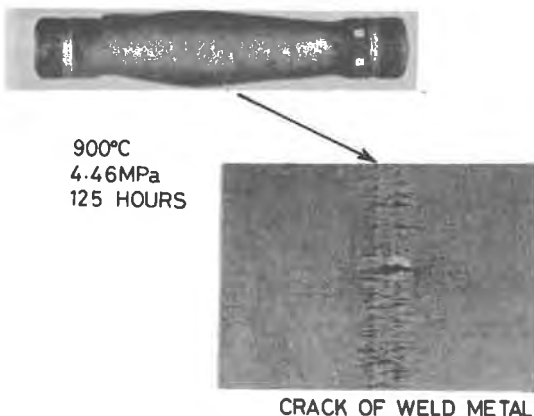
Deformation of the electron-beam welded cylinder after creep testing with internal pressure loading.
